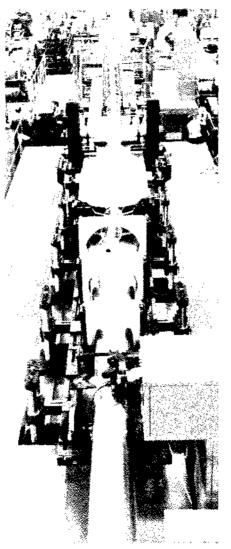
Machine for fabricating flexible, gasinsulated cable, under test by the manufacturer, Kabelmetal. The aluminum strip material moves toward the viewer through the forming tools and welding station (center) as the conductor with insulators is inserted. the sections was bent around a 3.4-m-diam hub. Subsequent dissection of this sample showed that no insulators had been damaged mechanically. A hub of this dimension would result in a total shipping diameter of 4.27 m (14 ft) or less.
